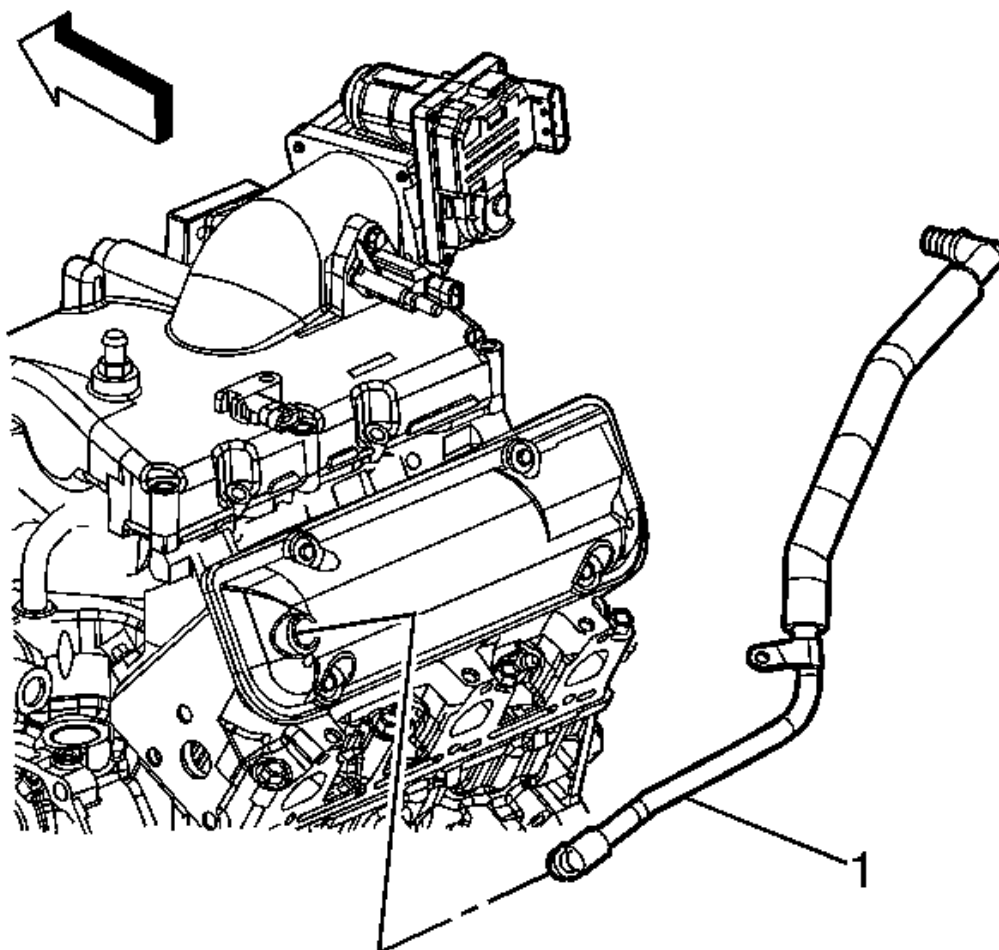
Identifying PCV Fresh Air Pipe At Valve Cover
